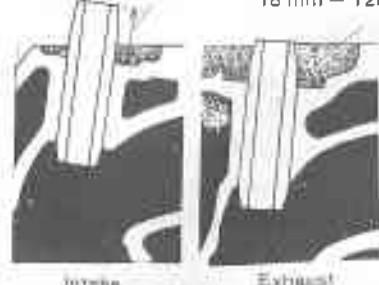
Valve Guide Bushing Protrusion G0828
